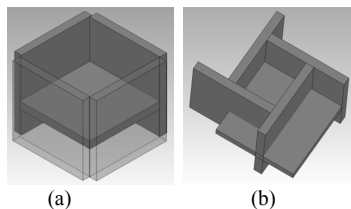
Challenge of 3DAC realization. (a) The vertical moving wall with maximum cross sectional area opened. (b) When the cross sectional area is shrunk, a rigid vertical moving wall cannot pass through.
